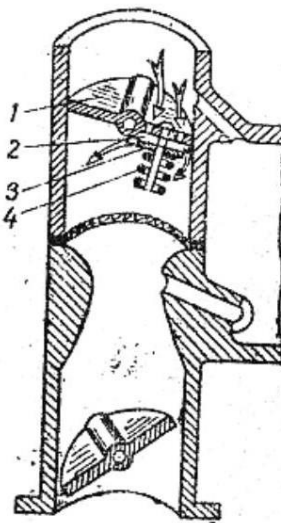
Drive mechanism. 1-air barrier cover; 2-hole; 3-valve; 4-spring;
